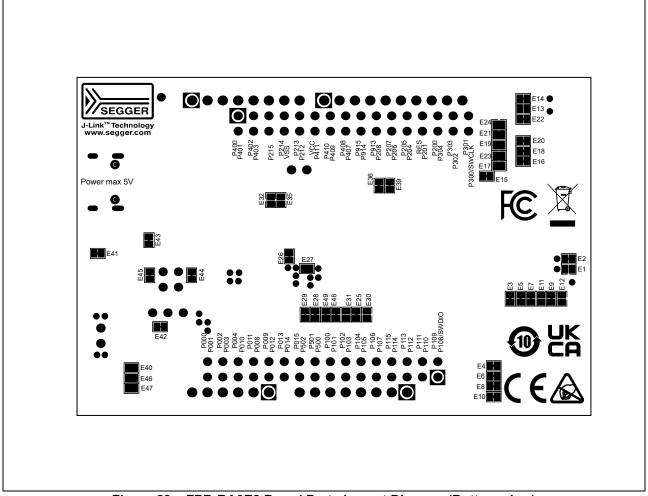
FPB-RA0E2 Board Parts Layout Diagram (Bottom view)
